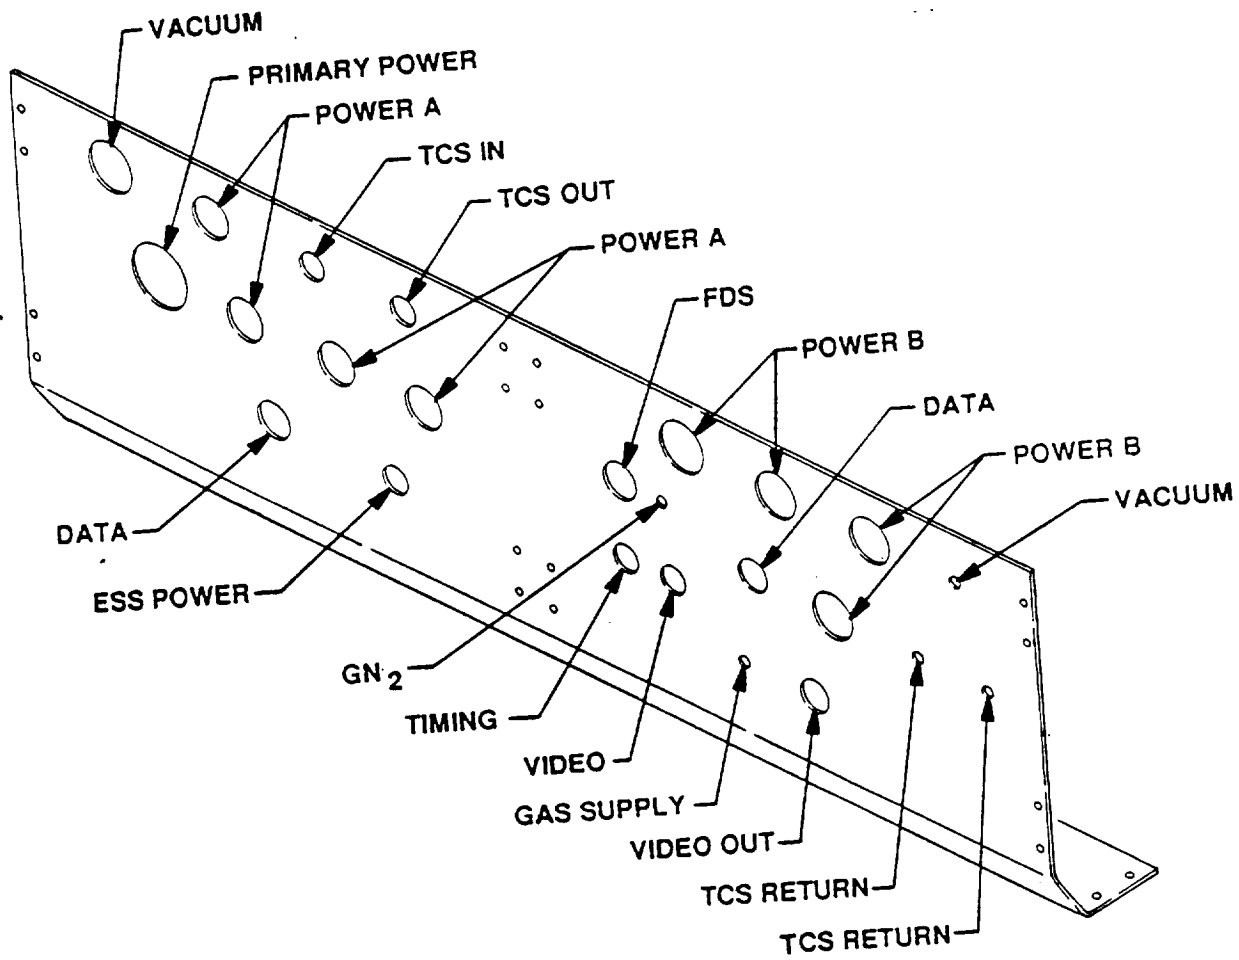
CORE RACK PANEL LAYOUT
